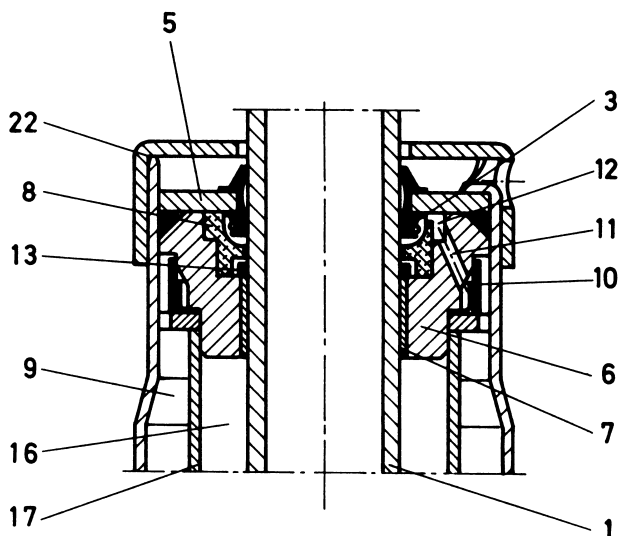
Rod guide and seal unit of the Sachs low-pressure twin-tube McPherson strut.
